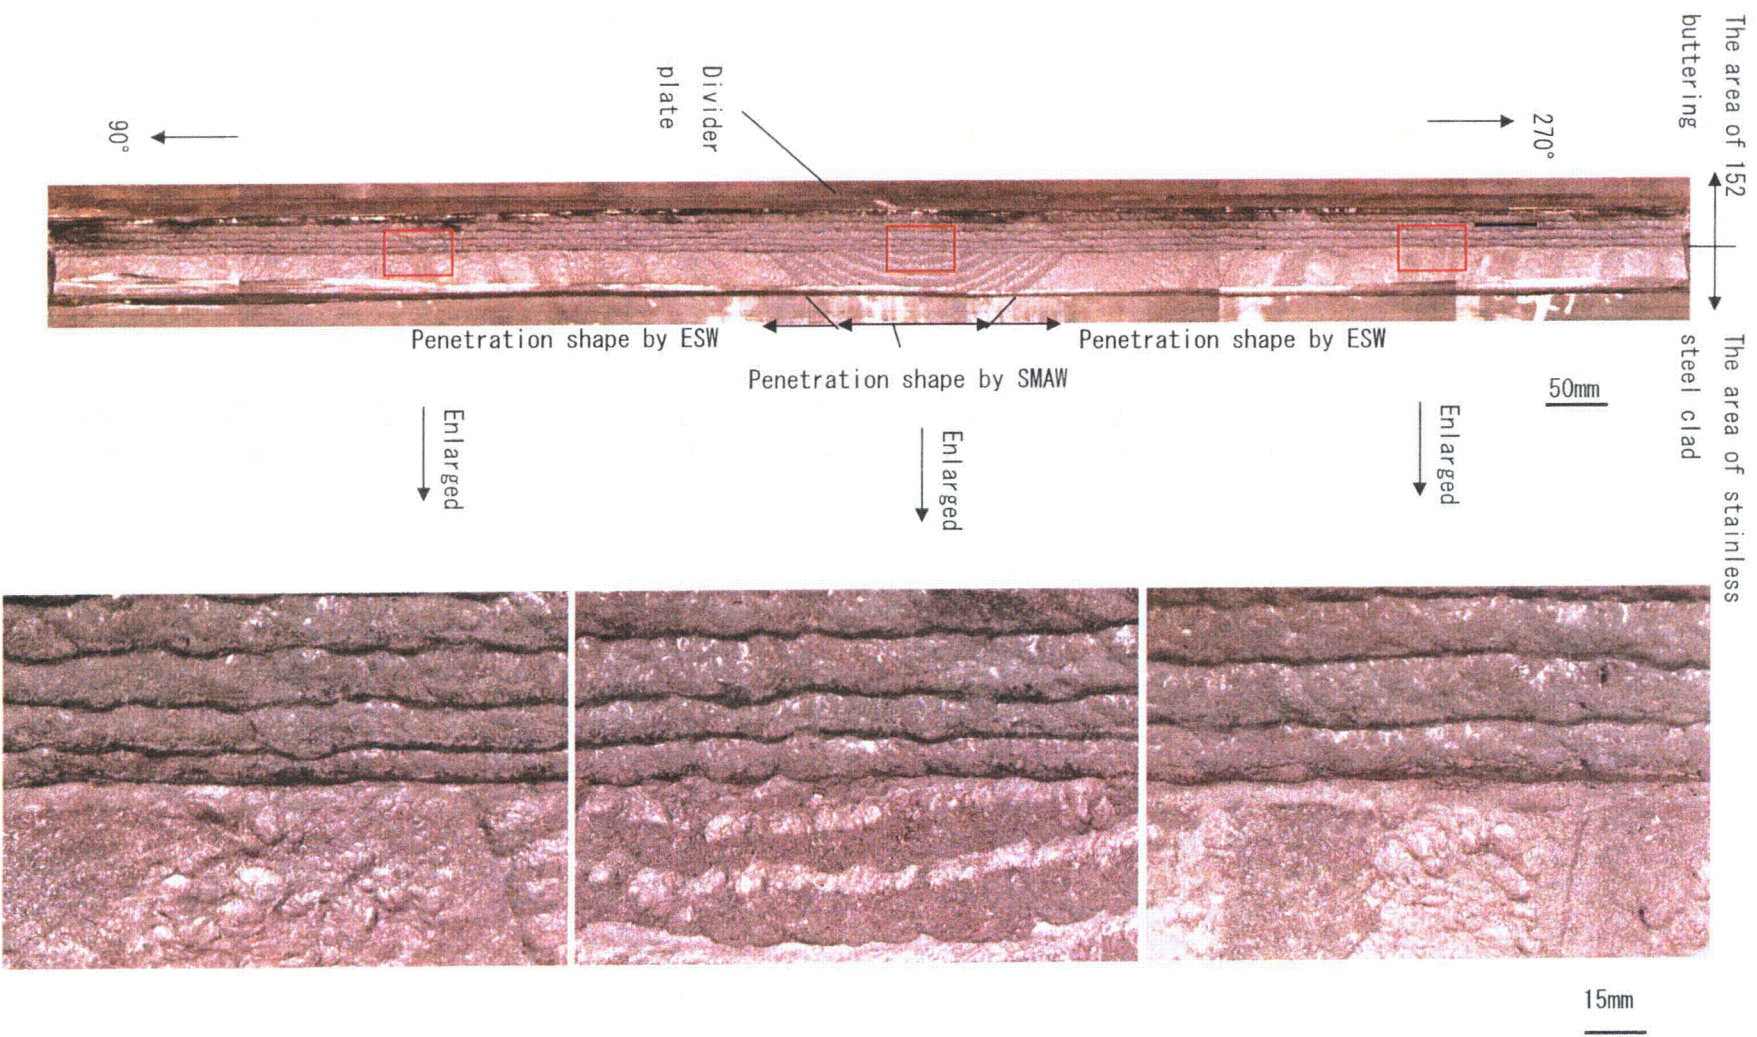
(2) Appearance of fracture surface of channel head body after removal of sample
